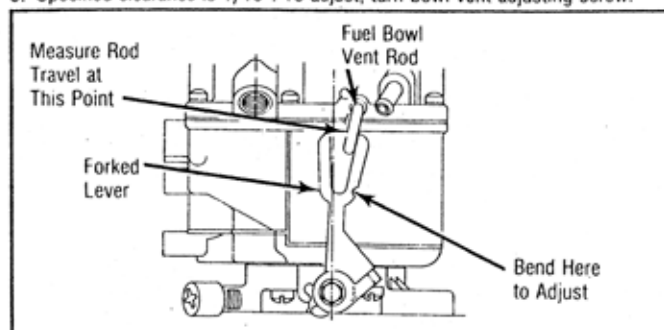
Bowl Vent Adjustment (Late Forked Lever Type)
